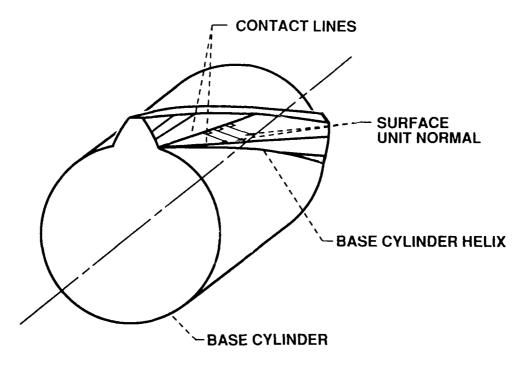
SCREW INVOLUTE HELICAL GEAR.
